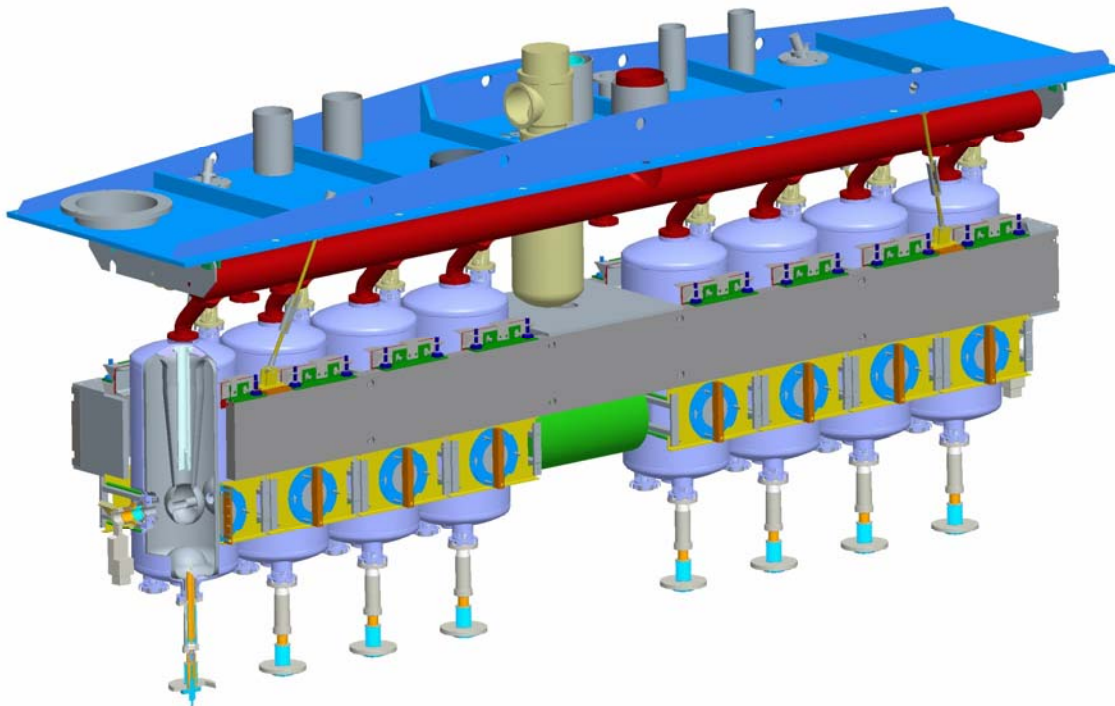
Schematic section view of the prototype cryomodule showing the top assembly and attached cavity string assembly, including beam-line valves and rf power couplers.
